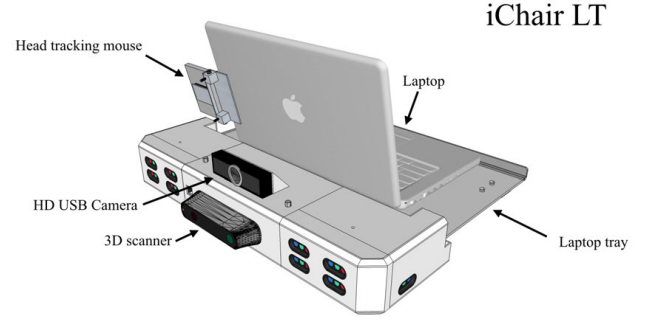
3D sketch of the iChair prototype after assembly of components in Fig. 2.
